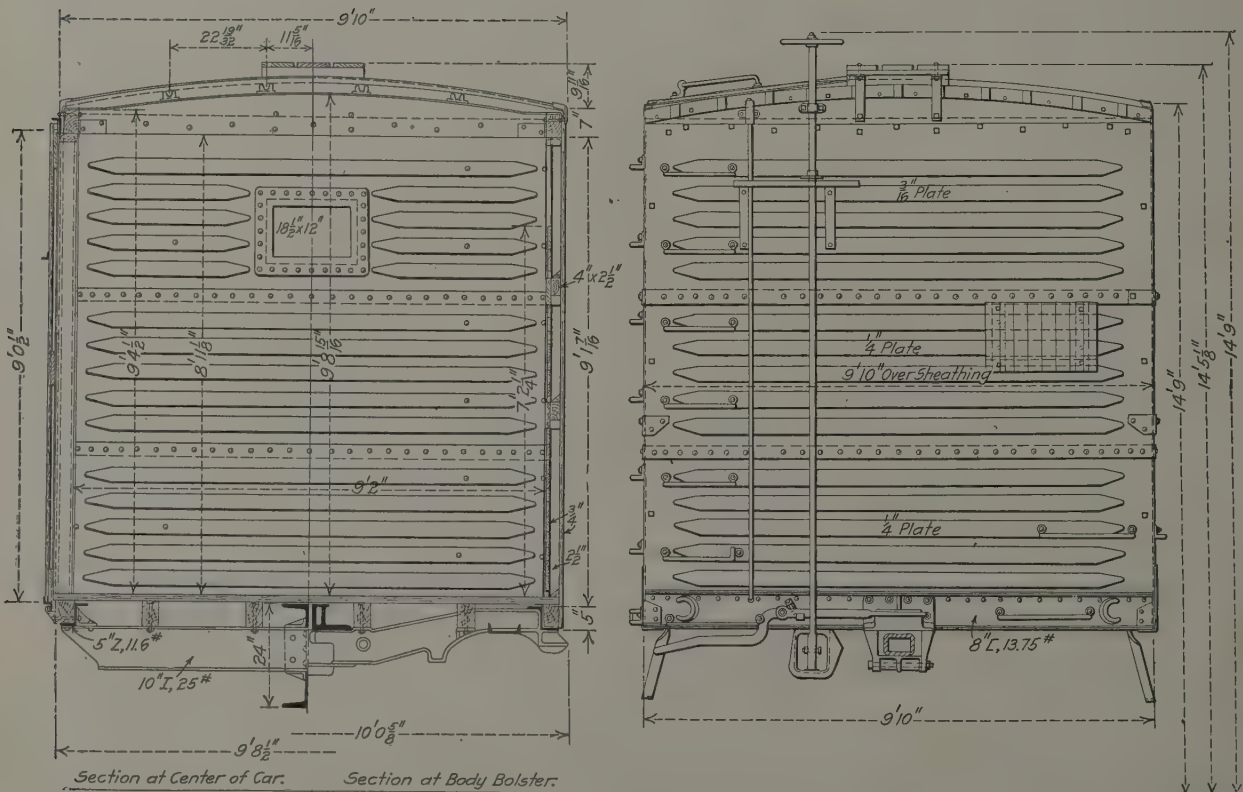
End Elevation and Cross Sections of Union Pacific Steel Underframe Box Car Shown in Figs. 23 and 25.
